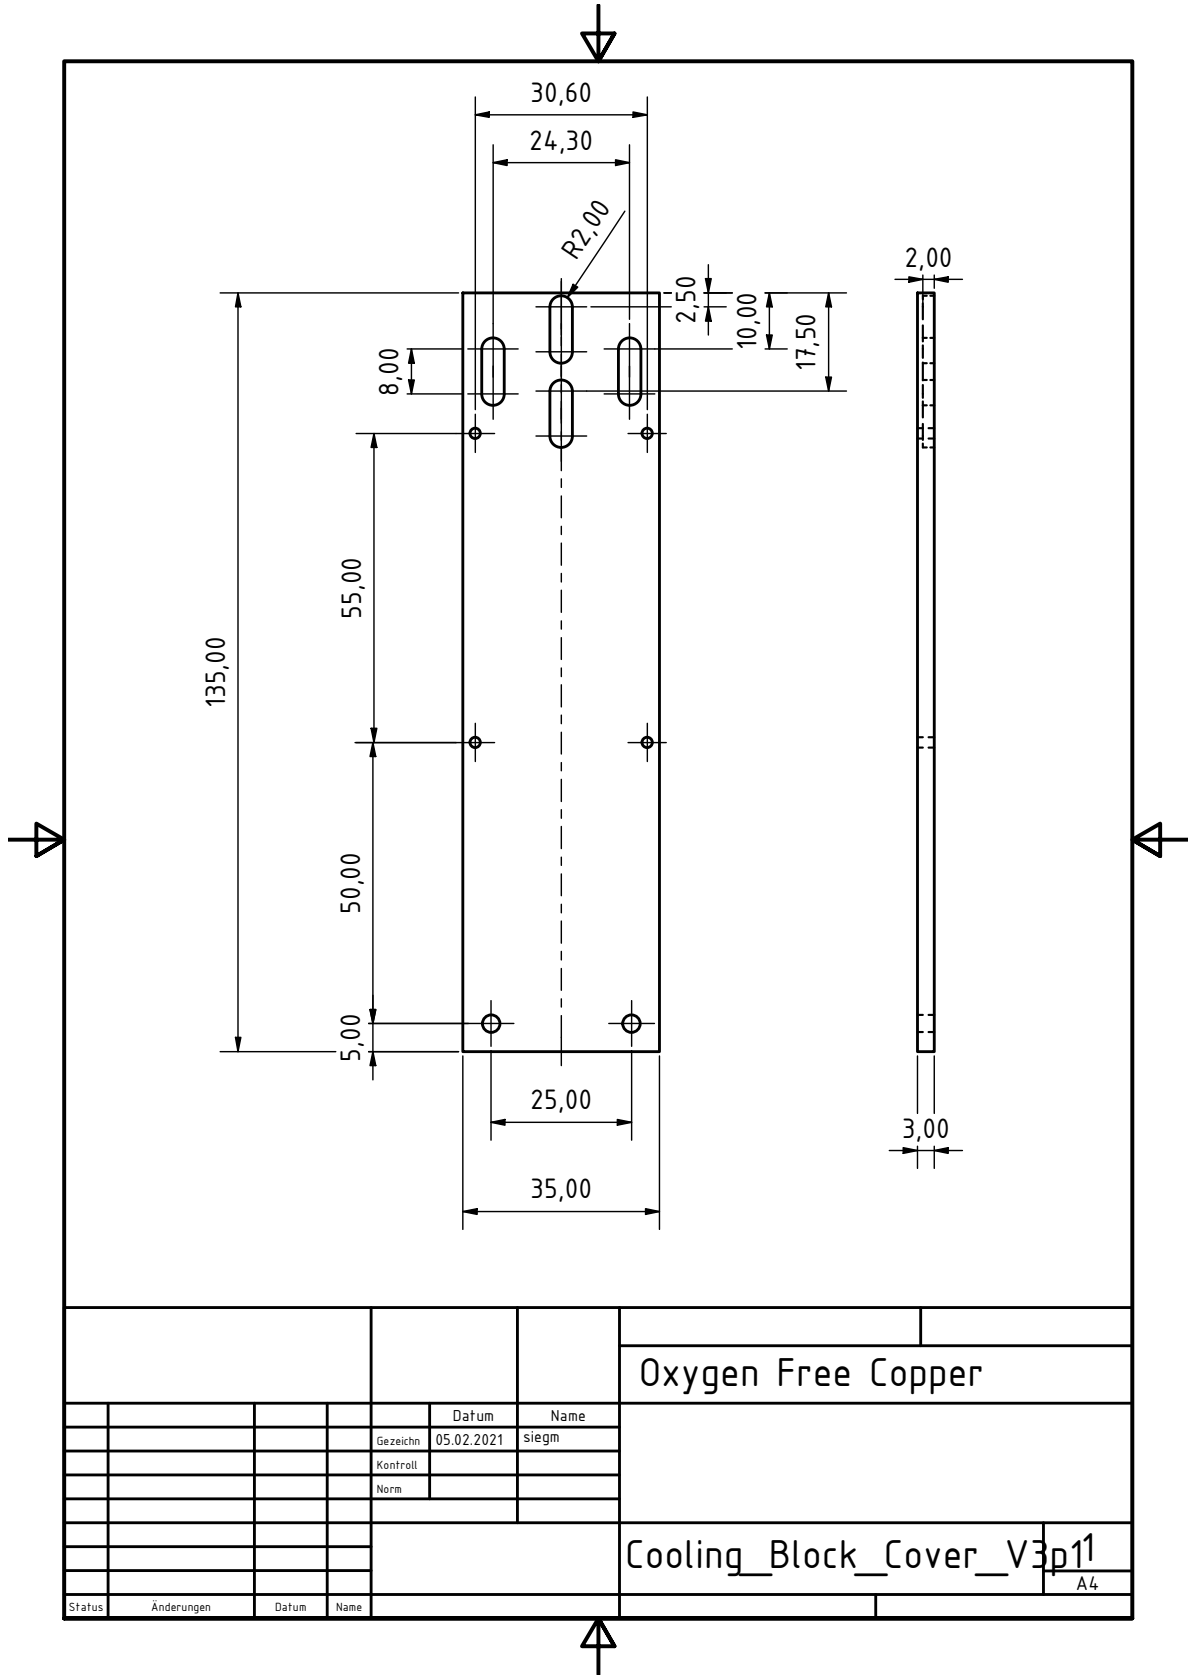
Detector module mechanical drawing - Copper cooling structure cover part
